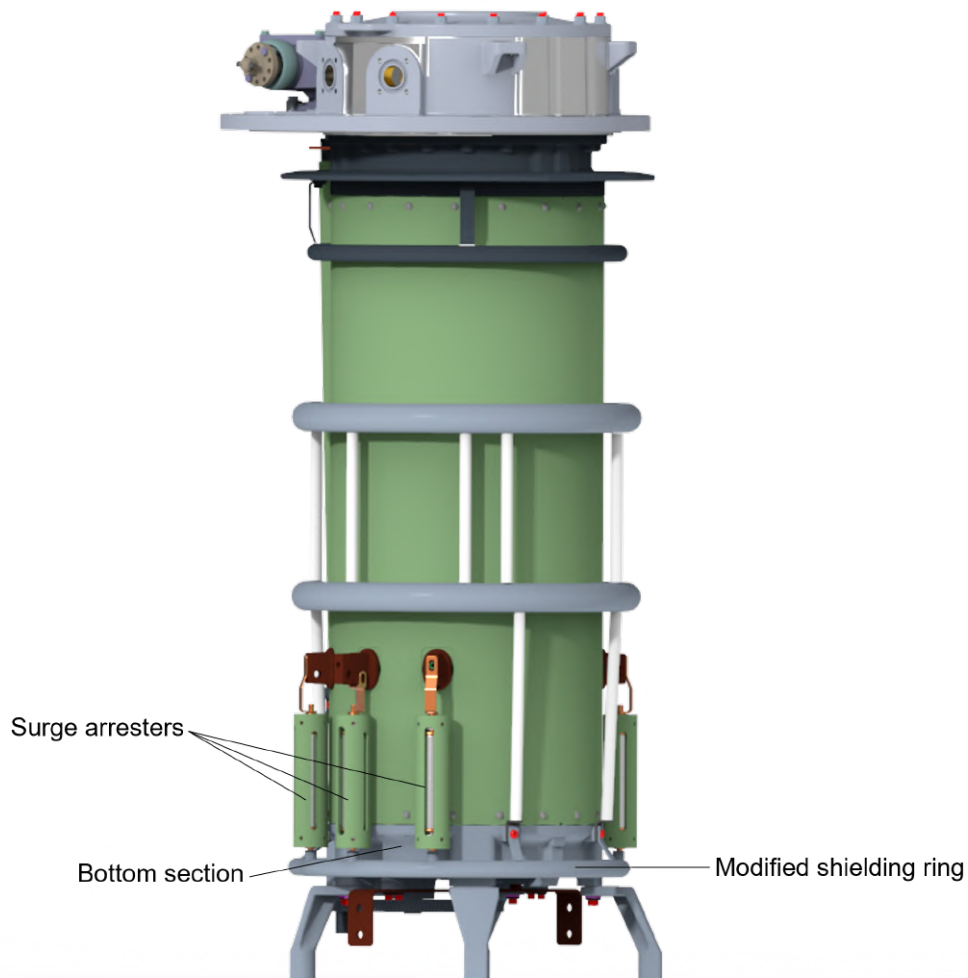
Concept "SixStanding Shieldring" mounted on OLTC.
